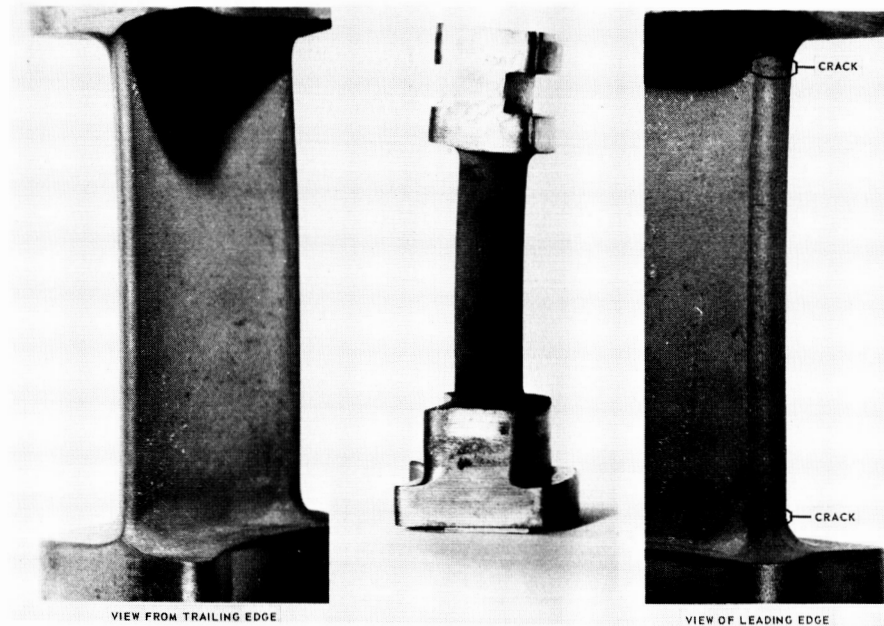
PWA 663 Convectively Cooled Blade Specimen After Test No. 1
